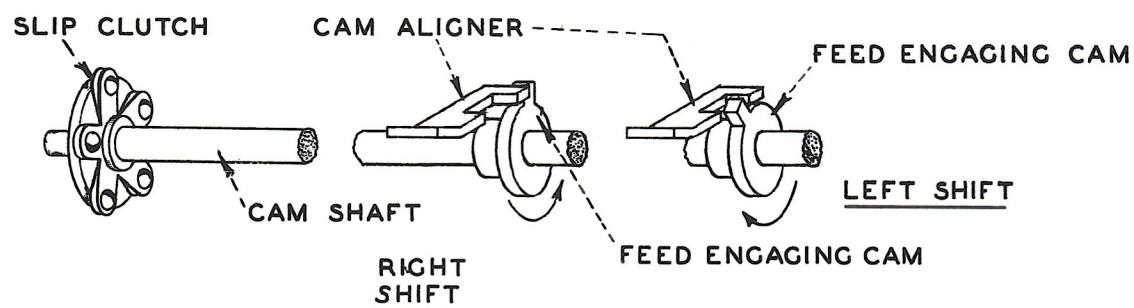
CAM SHAFT SLIP CLUTCH: When for any reason the cam shaft is obstructed its slip clutch will yield until the obstruction is removed. When this occurs the cam shaft will be out of time with the carriage shift action. The cam shaft is retimed automatically whenever the carriage is shifted to the extreme right or left. These shift positions occur at the beginning of a square root problem.
